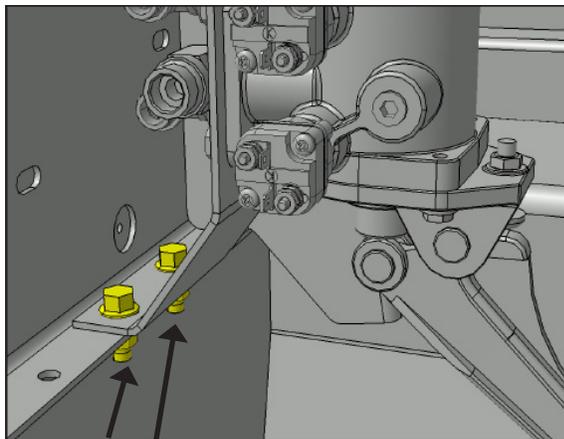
Reinstall the two sets of 3/8" bolts and nuts from the bottom of the treadle valve.
